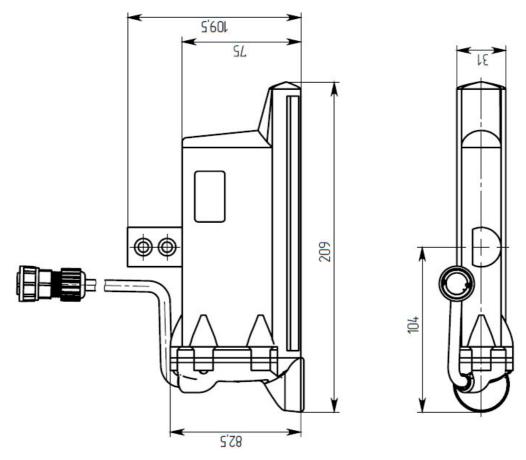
Monoblock outline drawing (version for mounting via shank)
